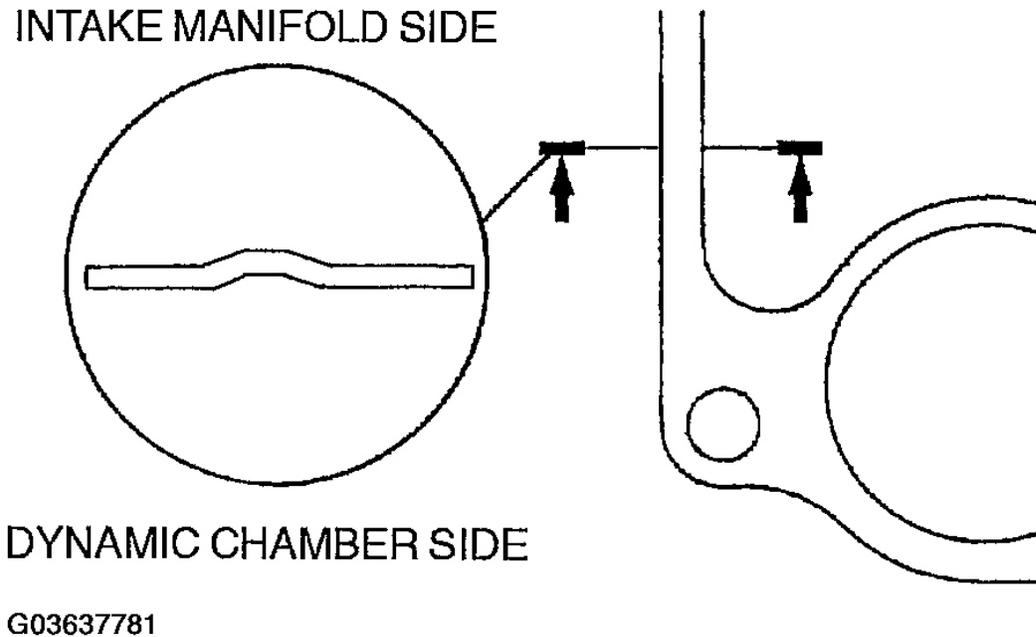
Installing Intake Manifold Gasket With Convex Side Of Gasket Facing Intake Manifold Side
